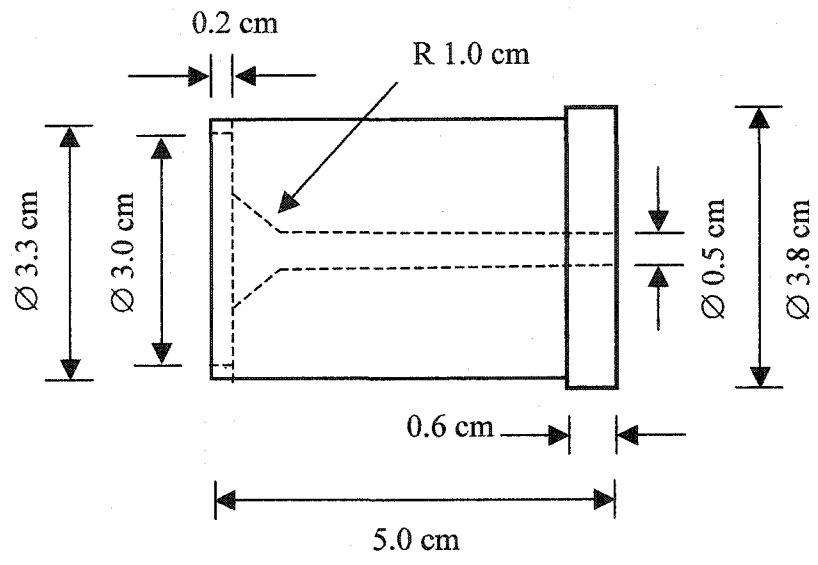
Details dimensions of the sample holder used in E-C test.
